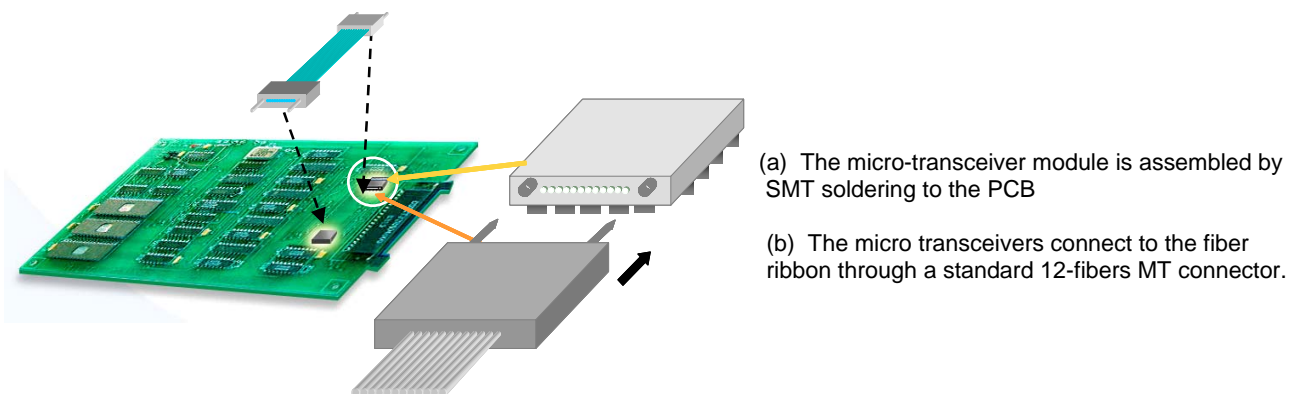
Micro-Transmitter/Receiver Assembly & Interconnection on the board.
